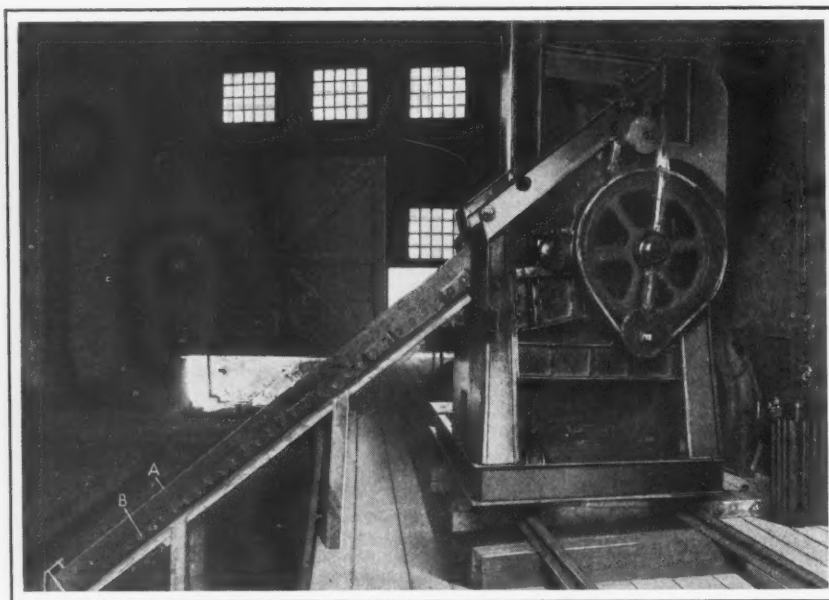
Coke-handling Machine Constructed Entirely by Arc Welding
